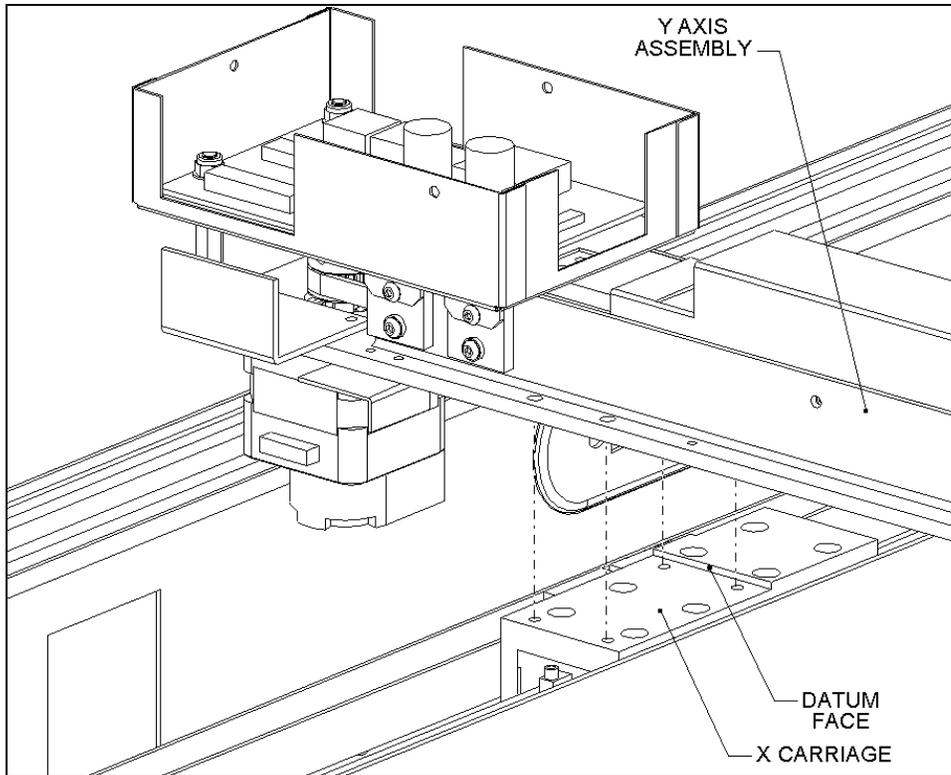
Mounting the Y-Drive Assembly on the X-Drive Assembly
